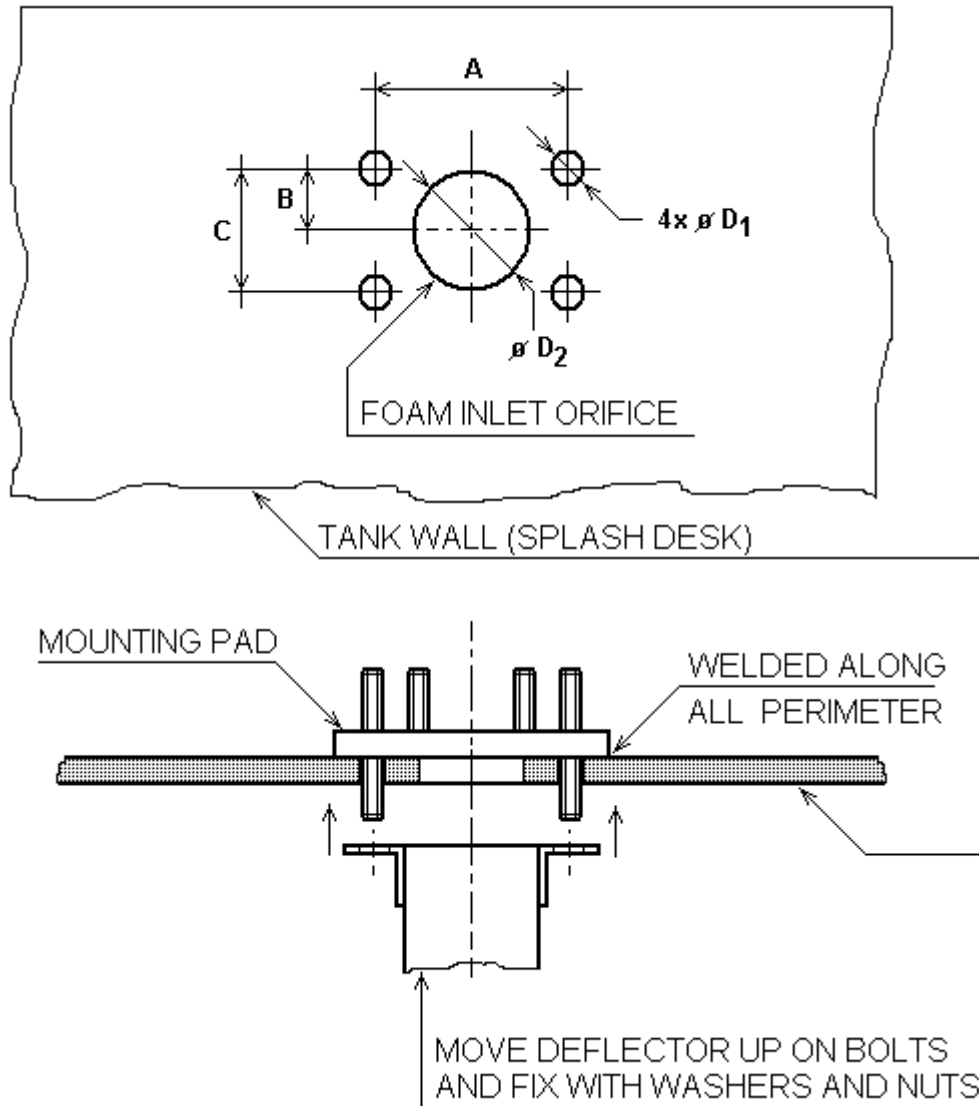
Installing the foam maker with use of the mounting pad. Dimensions in mm are shown in the table below.
